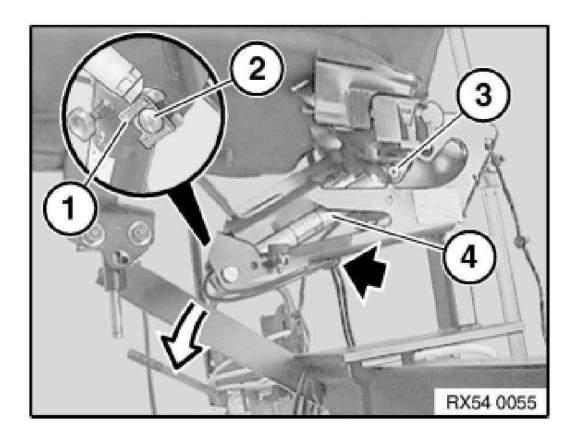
Removing Retainer And Drive Out Pin Courtesy of BMW OF NORTH AMERICA, INC.
